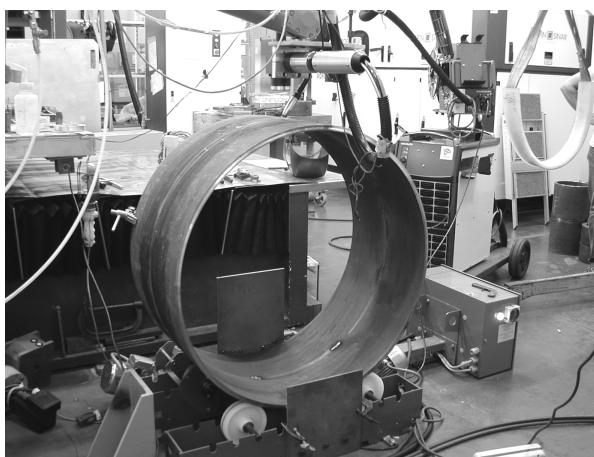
Weld setup for X100 pipes (1G position)
